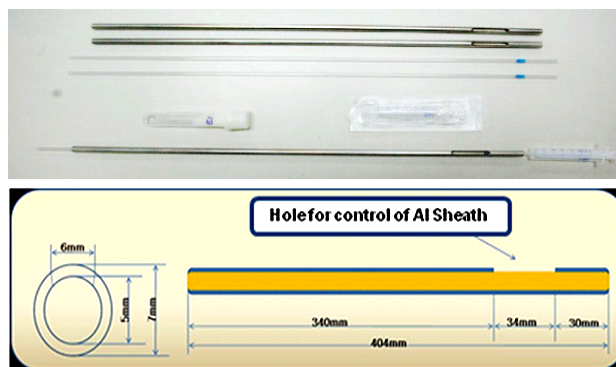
Diagram and photograph of AIB gun and its assembly.
